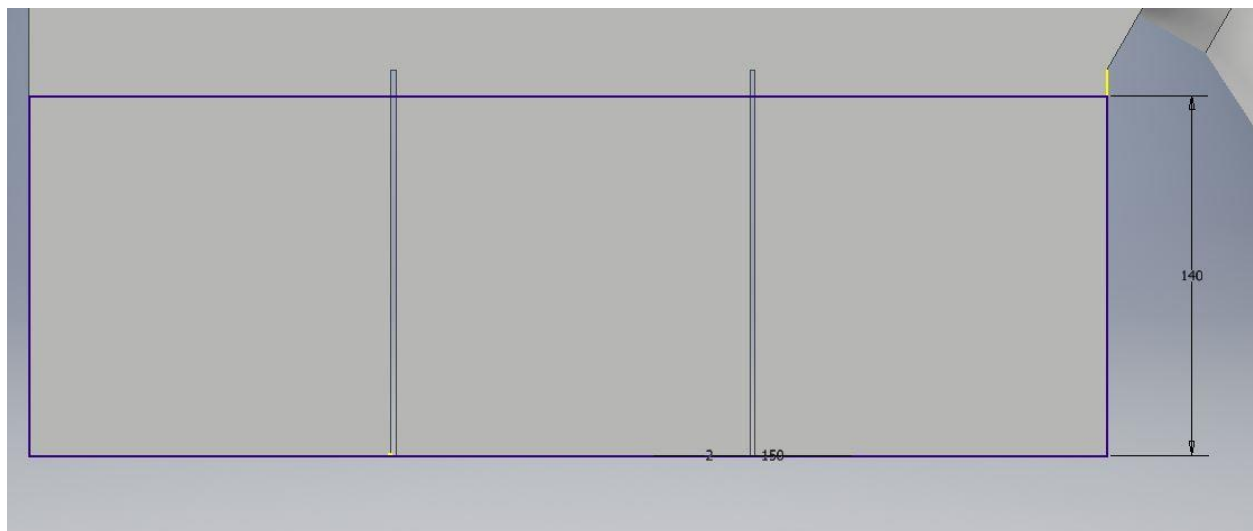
Drawing a section to cut the base part away and then attach the collecting bins.
